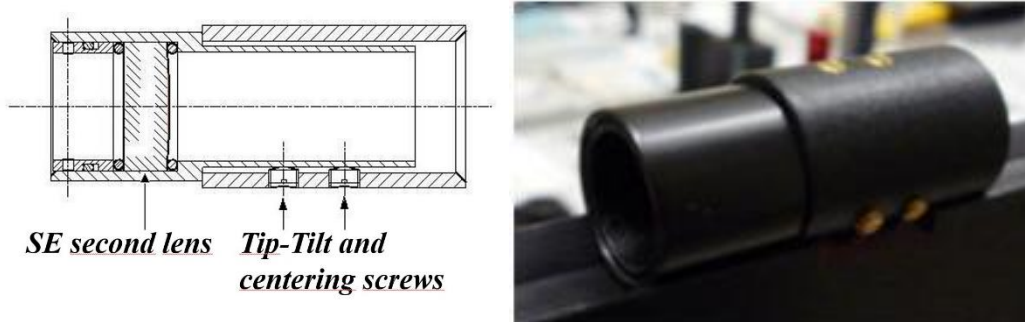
mount of the second SE lens. On the left the mechanical drawing of the mount. Tip-tilt and centering alignment is performed using three couples of screws (only one couple is shown here). On the right a picture of the mount.
